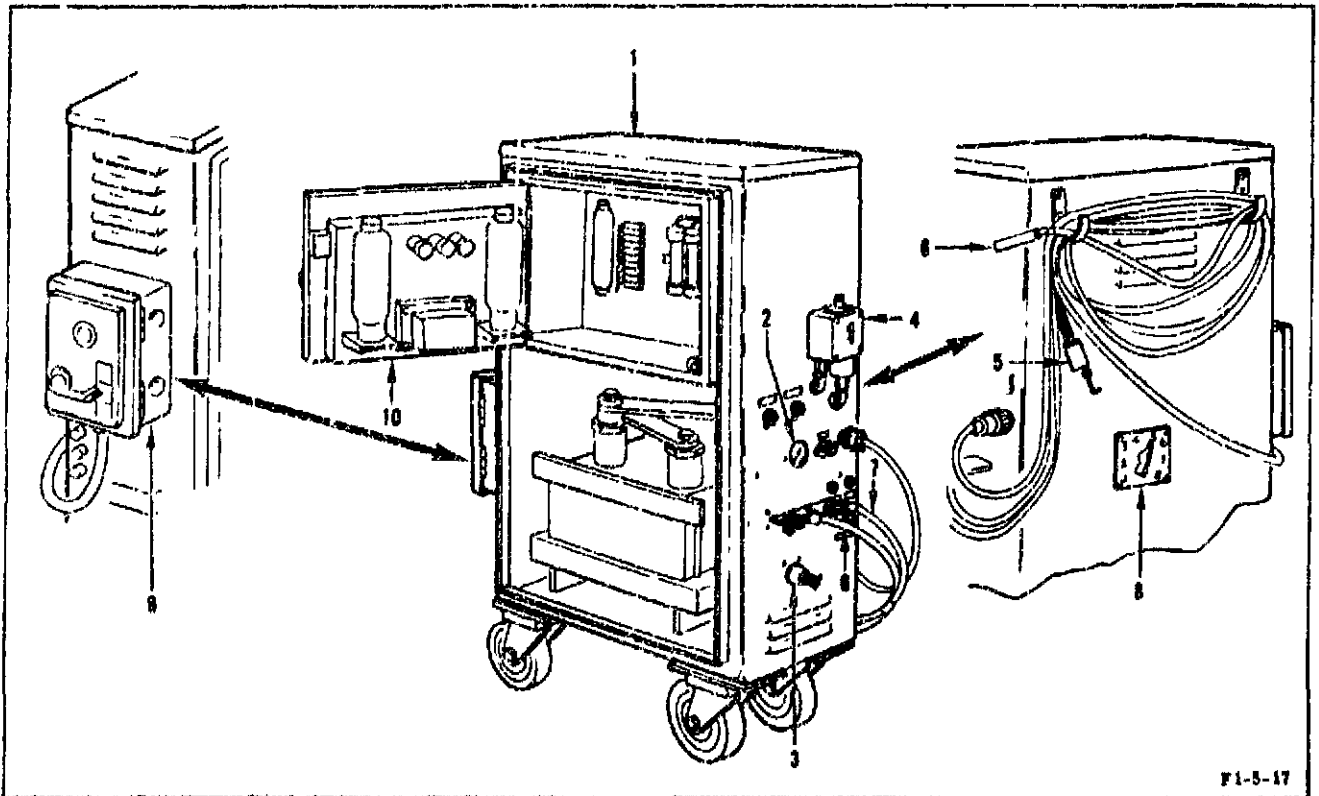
Disassembly of Components Welding Set 9026561 (Sheet 1 of 3)
